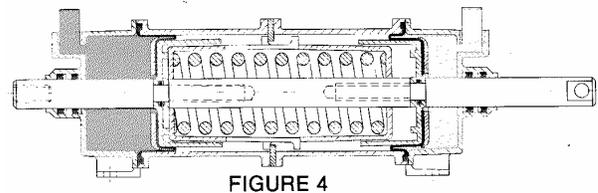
shows the cylinder with air pressure accumulated at the left hand side behind the diaphragm and piston assembly. This causes the piston rod to move to the right. The spring is retained by a spring housing which is caged behind a center ring. Again a rolling diaphragm and spring permits infinite positioning in both directions. In order to prevent premature damage to the diaphragm, it is recommended to maintain a 2-3 psi pressure at all times at both end of the cylinder.
